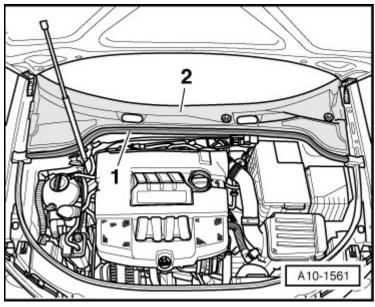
Plenum Chamber Cover And Rubber Seal Courtesy of AUDI OF AMERICA, LLC
